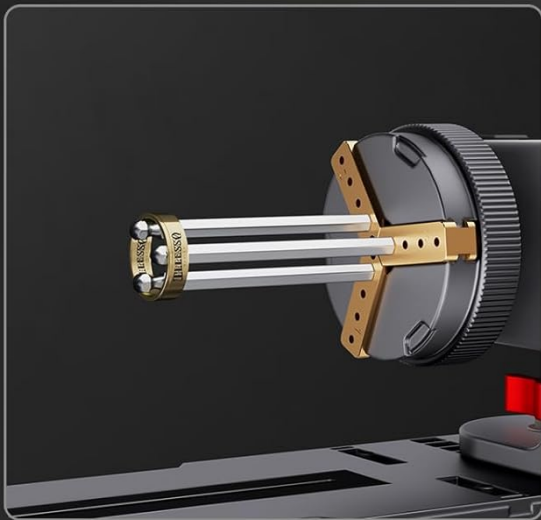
The R8 is equipped with three sets of fixtures to adapt to multiple special-shaped materials, including objects with handles and spherical items.
